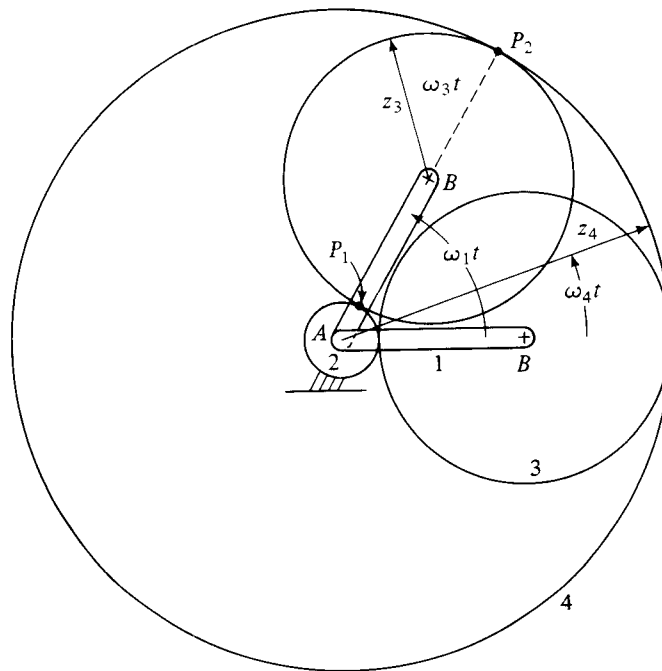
A three-gear (four-link) planetary gear train with the sun gear (link 2) grounded.
